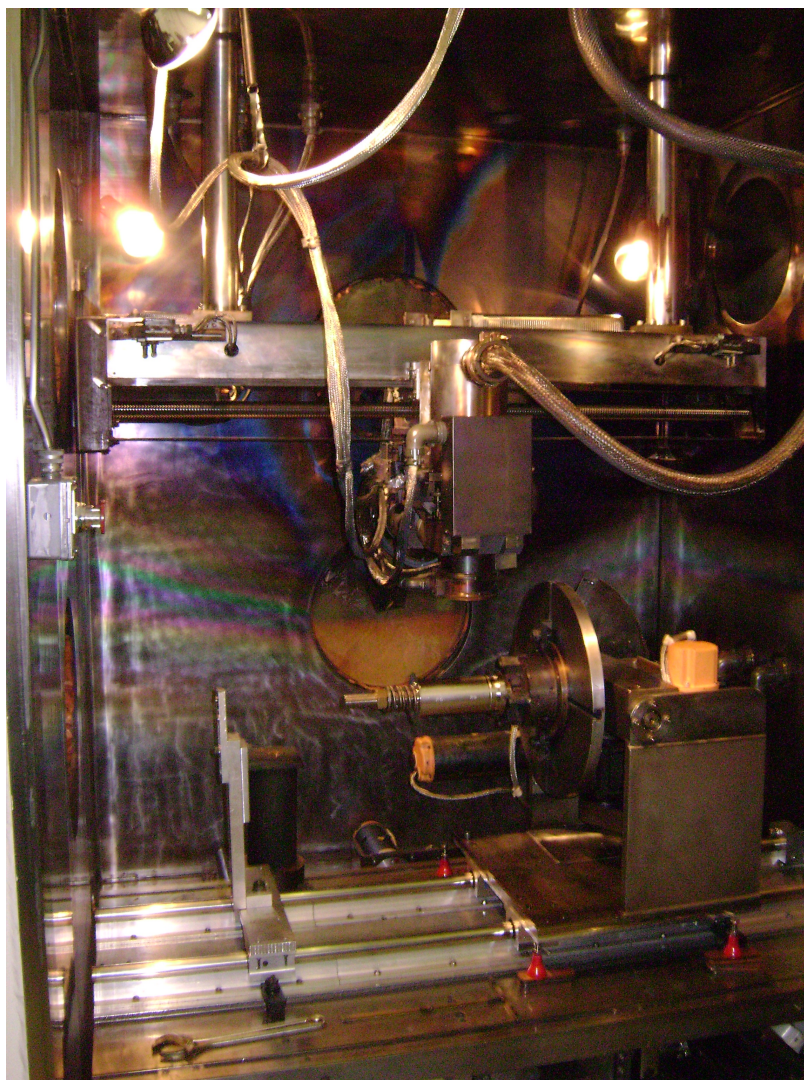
Sciaky 6-axis E-beam welder located at Jefferson Lab. Pictured here is the vacuum chamber open with the beam tube inserted for welding.
